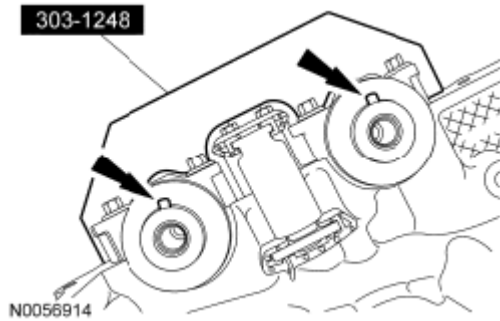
Identifying Camshaft Holding Tool On Flats Of Camshafts
